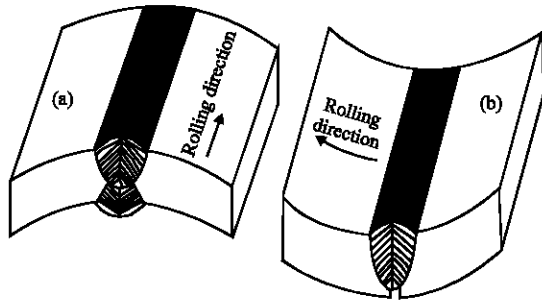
a): Double sided single pass submerged arc weld seam and b): Transverse ore skelp end weld seam
